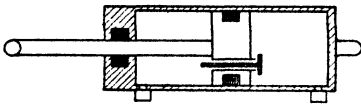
MOUNTING OF A SEQUENCE VALVE IN A JACK
